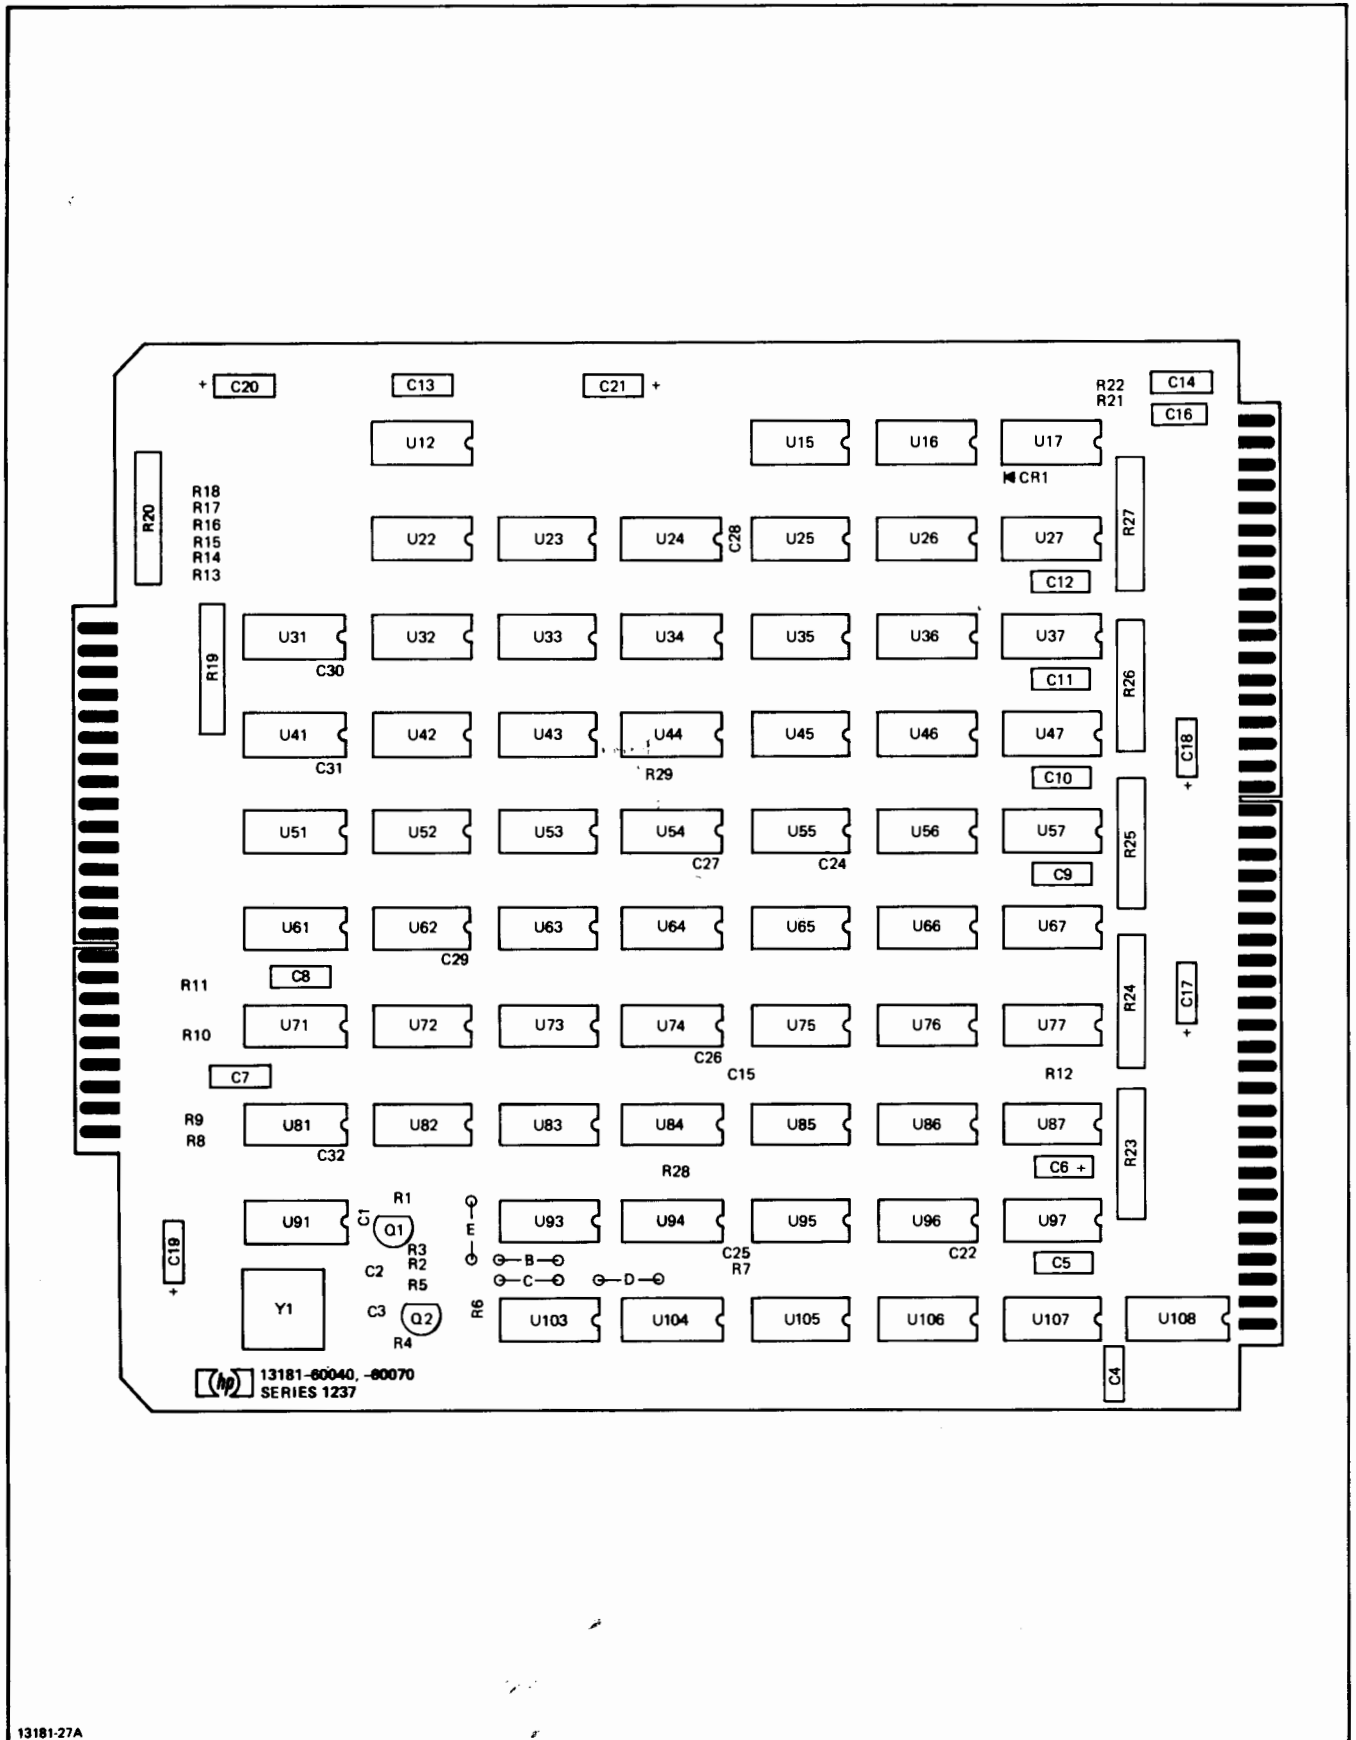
Mag Tape 1 Assembly Parts Location Diagram
